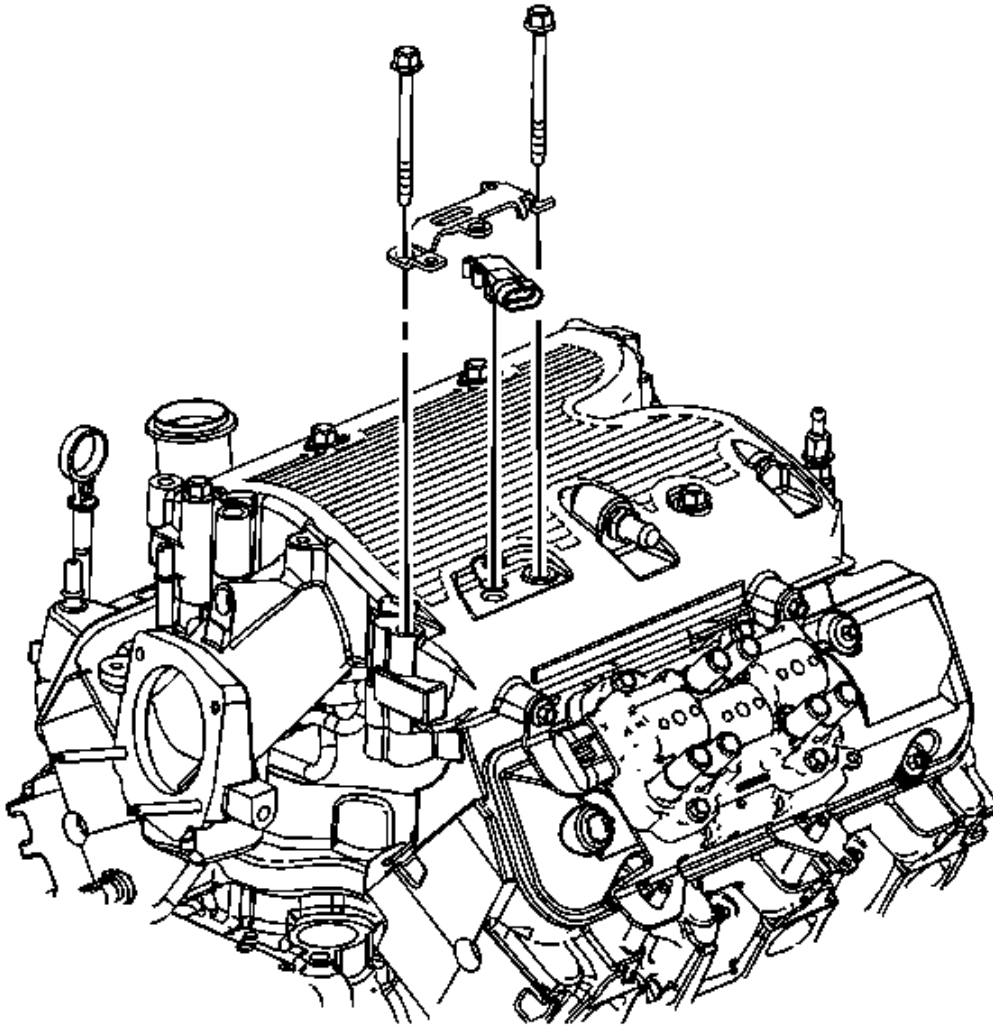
View Of MAP Sensor Seal & Upper Intake Manifold
